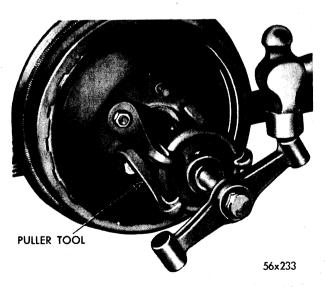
Removing Rear Hub and Drum Assembly with Tool C-845
